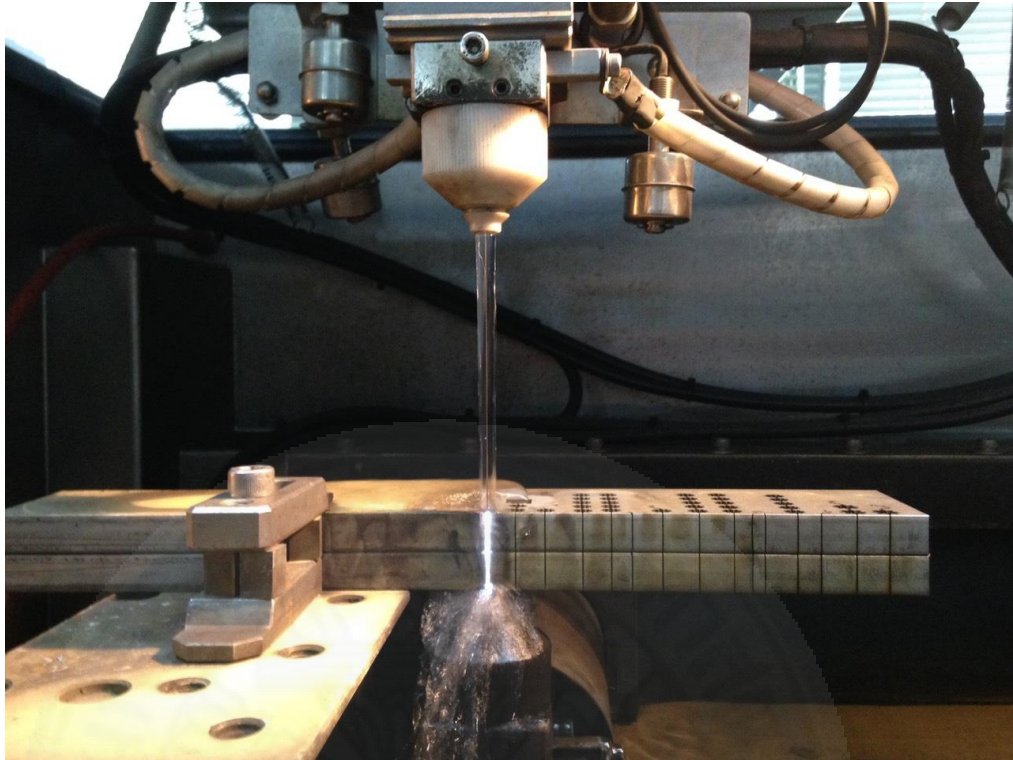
Workpiece and the sparking process on wire-EDM worktable
